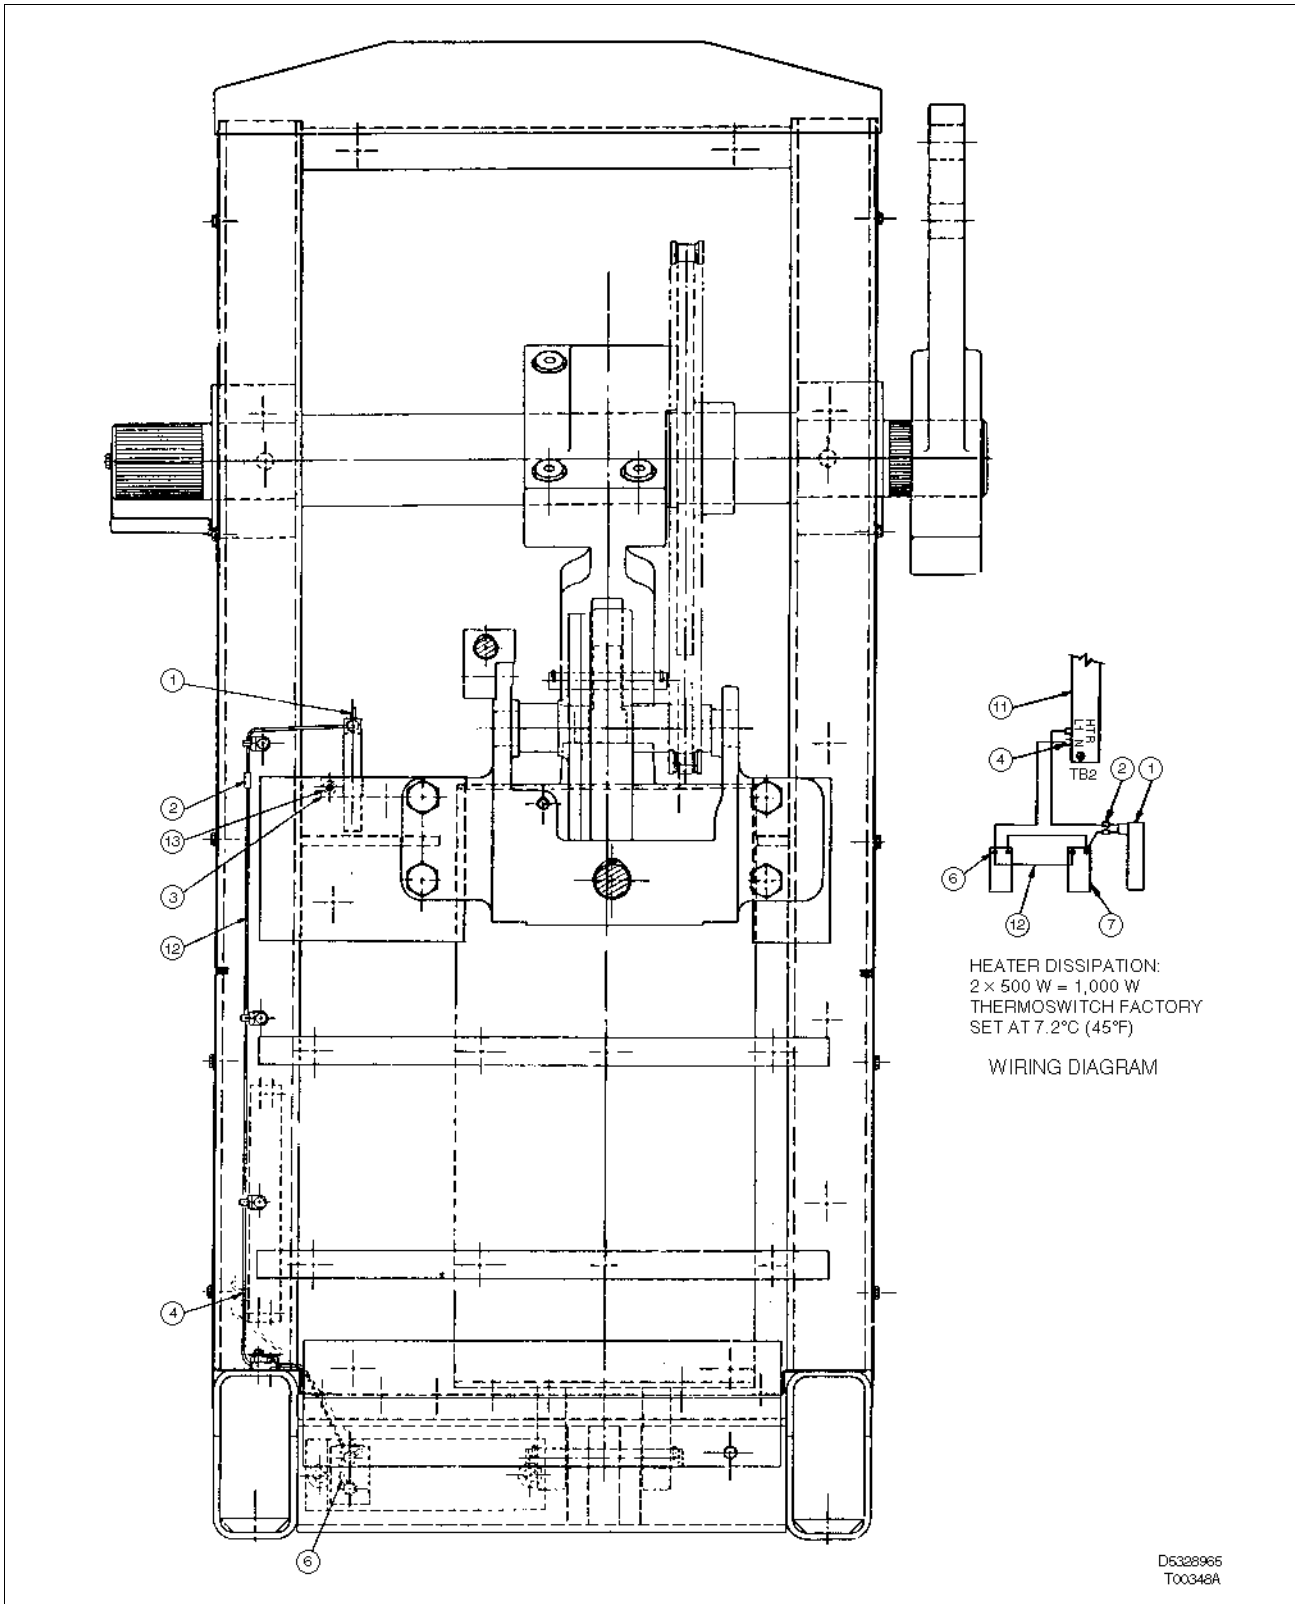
UP5 and UP6 Actuators with Heater, Table A-46 (Sheet 1 of 2)
